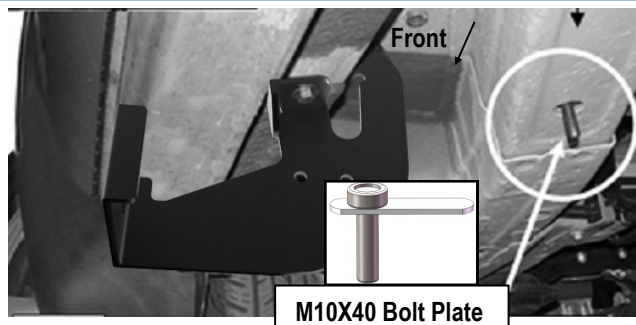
Driver Front Mounting Bracket (DFM) Installed
